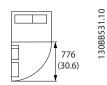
Space in front of IP21/IP54 enclosure type, frame size F8
